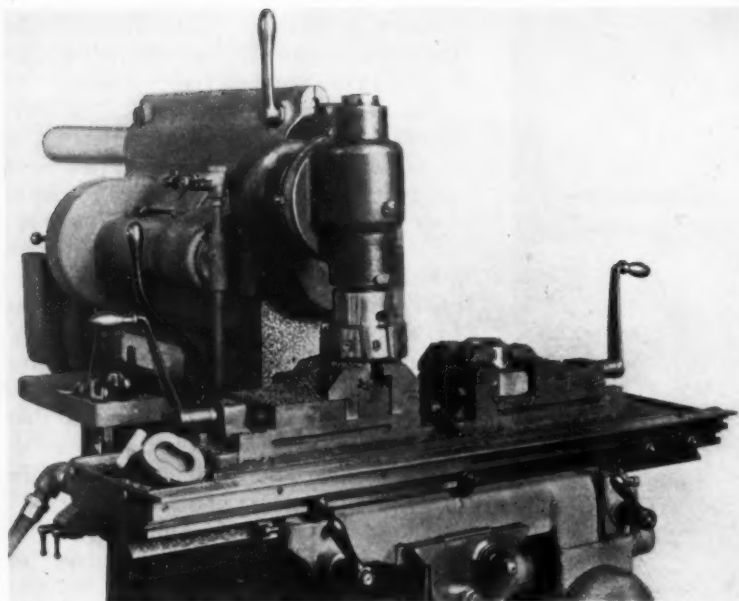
RECIPROCATING MILLING WITH VERTICAL-SPINDLE MILLING ATTACHMENT
